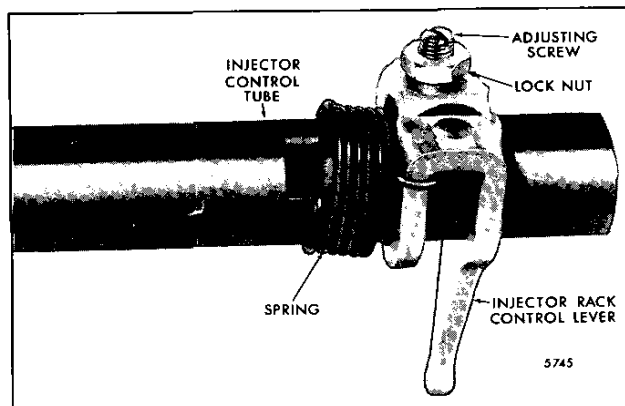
Injector Control Tube and Rack Lever (Spring-Loaded)
